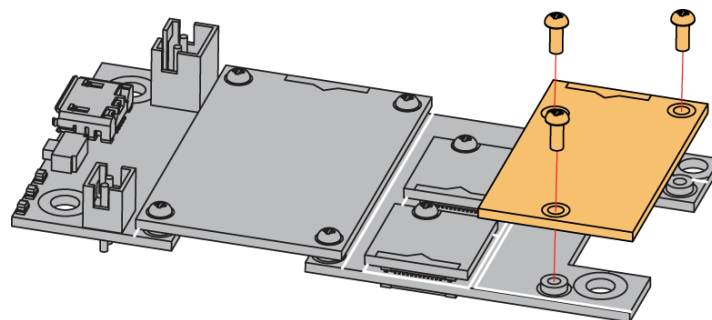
RAK12016 mounting mechanism on a WisBlock Base module
